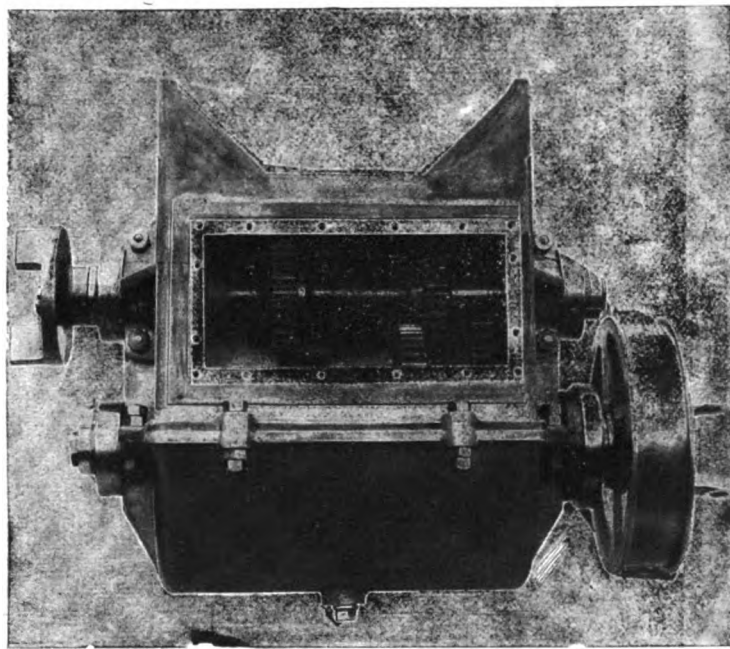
The British Motor Fittings Company's Change-Speed Gear.
